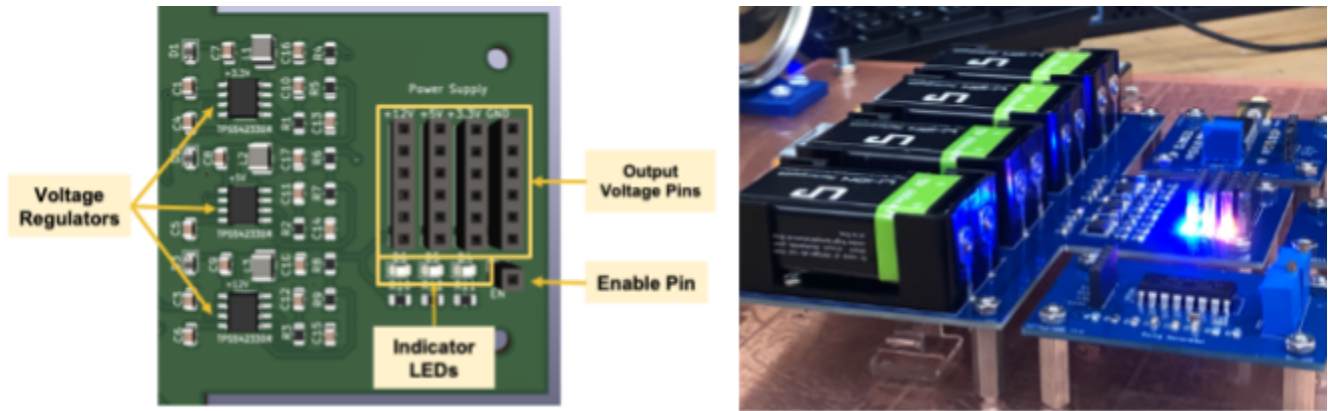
Left: Power supply PCB 3D rendition. Right: Power supply with batteries inserted.
